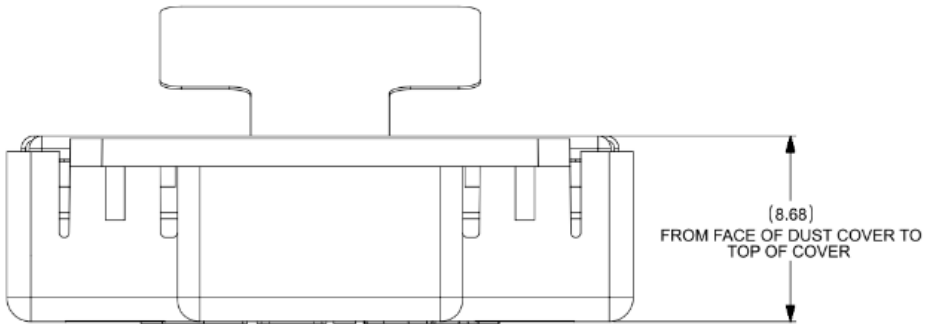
Top View of Free-Side Connector with Dust Cover Attached
